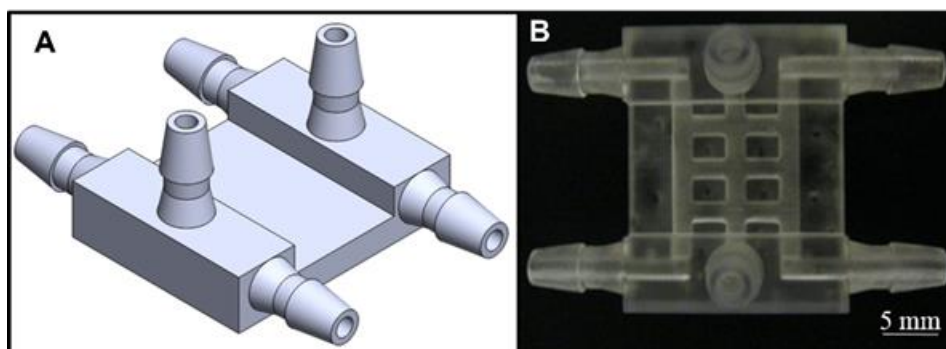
(A) CAD design of 3D-printed culture channel device and (B) photograph of printed device.
